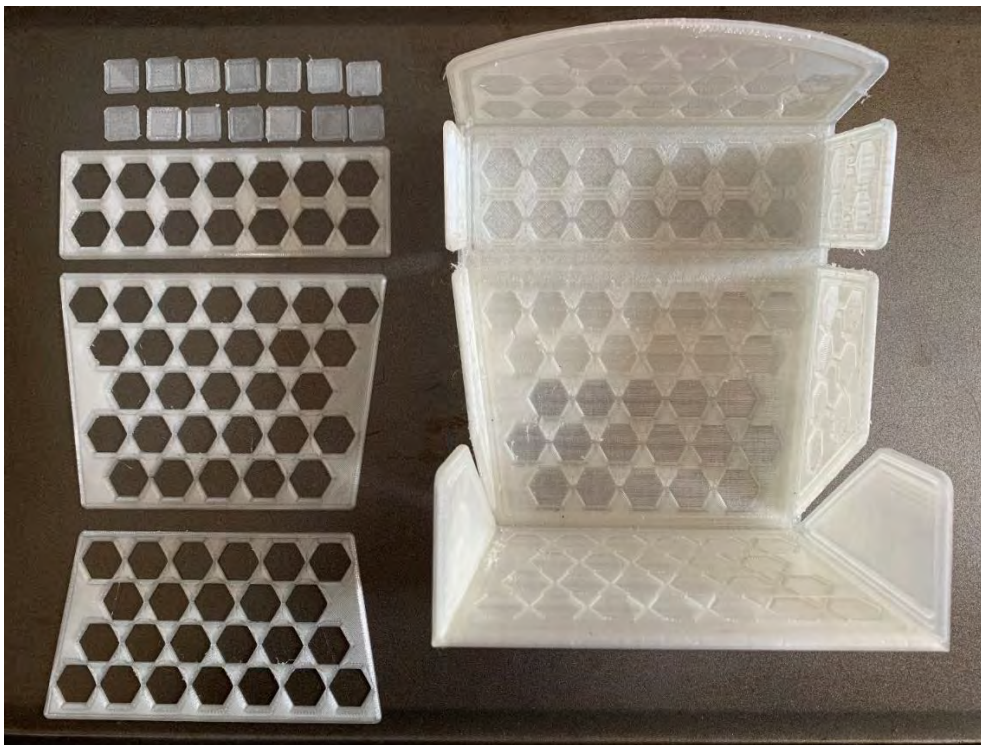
Layout of 3D printed part of the mode. Overall structure, cushions and solar panel I
